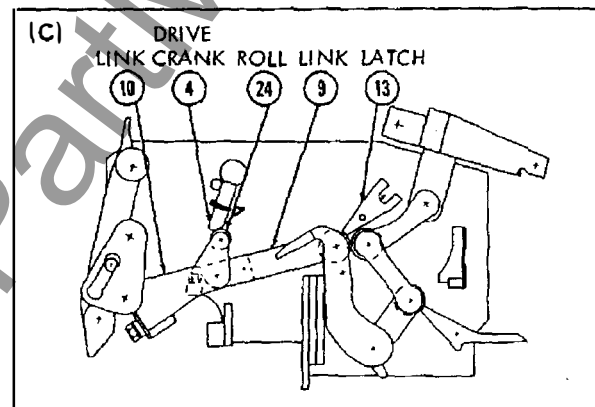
Fig. C - Breaker Open, Springs Charged. As the closing springs become fully extended, cranks (4) push links (9, 10) over toggle and cranks (4) disengage roll (24) and rotate out of the way. The closing springs are fully charged and held by spring release latch (13).
